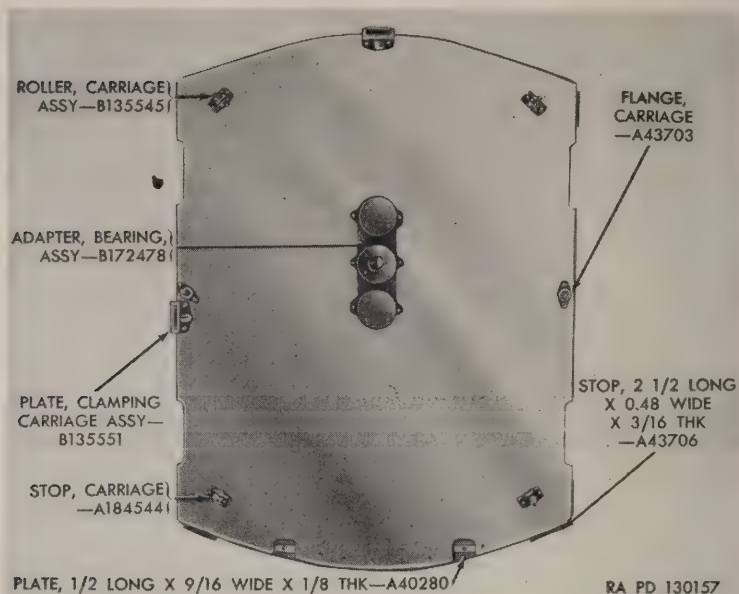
Curved-base carriage assembly—C79083, sound-ranging plotting board M1 or M1A1—bottom view.
